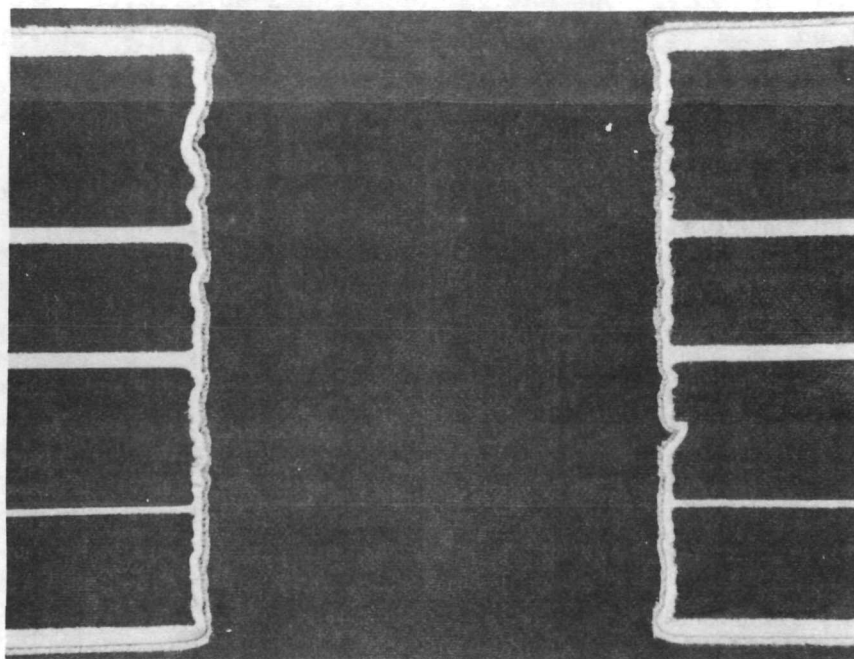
Photomicrograph (36X) of a Cross Section of a Typical Defect-Free Plated-Through Hole in a Standard Multilayer Test Board.
